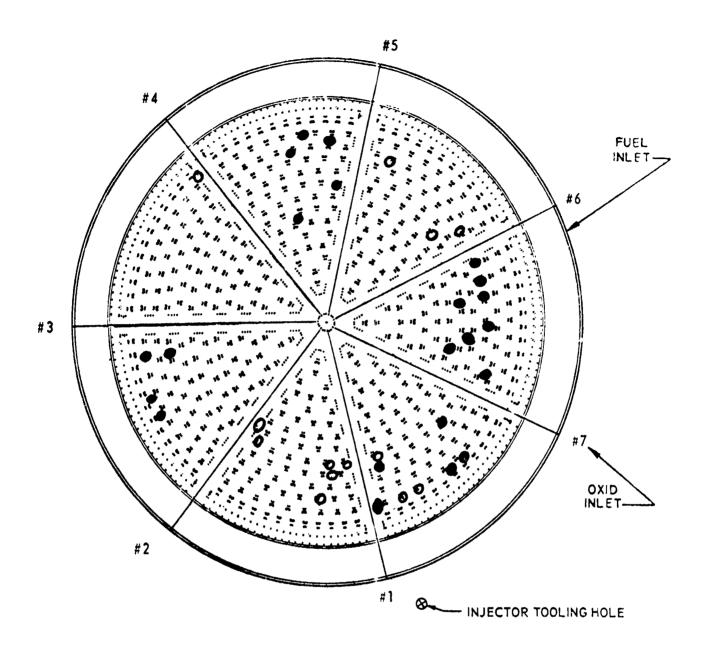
Location of Base Weld Cracks, Injector S/N 696, (1 of 2)
